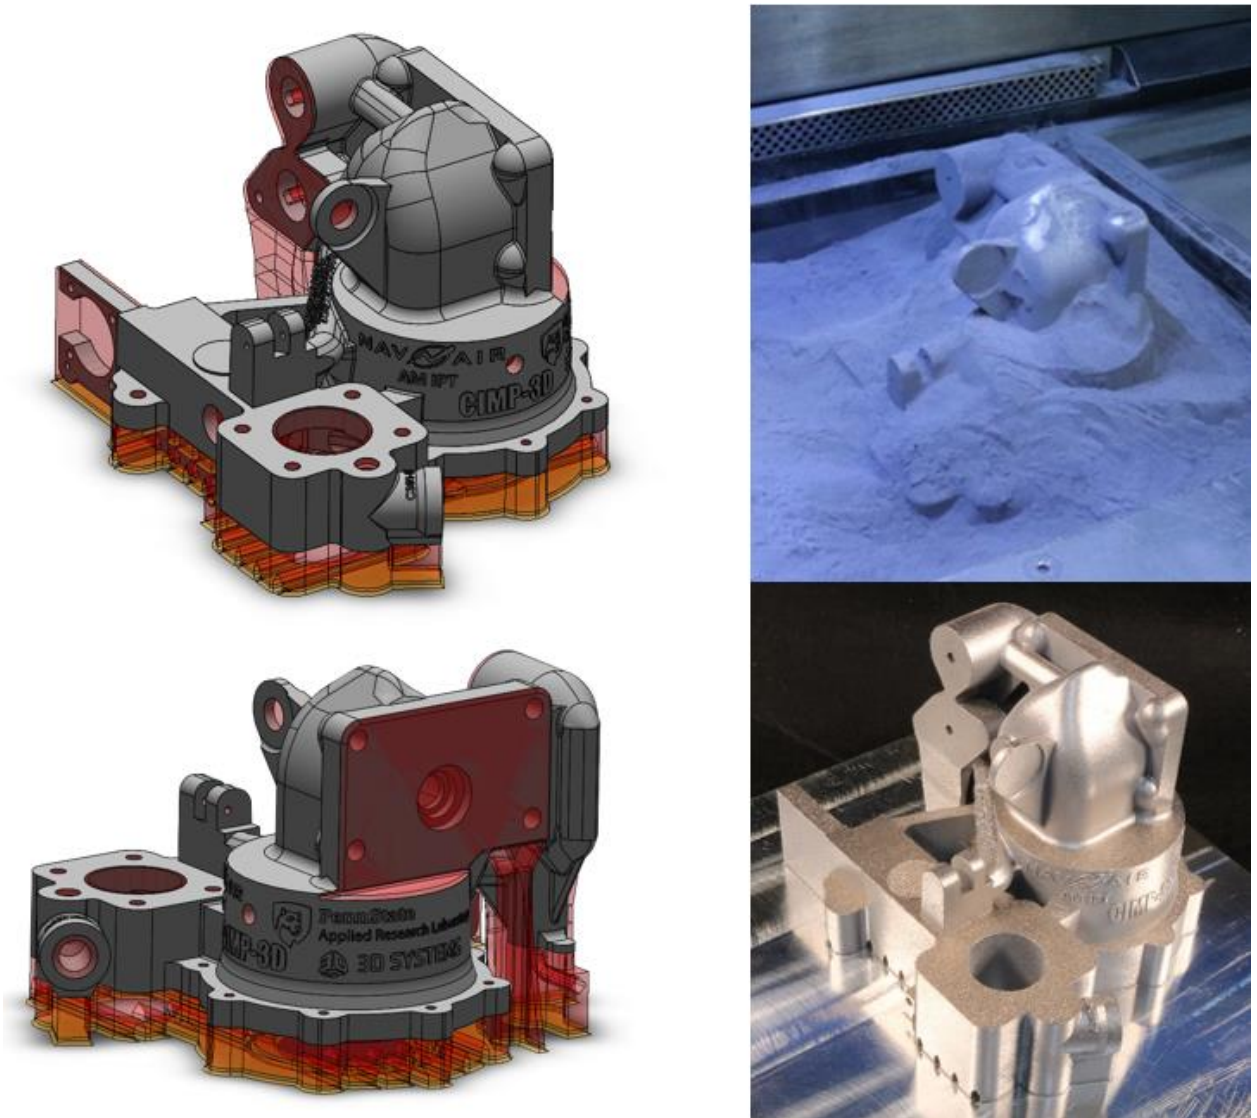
Left the digital model of the produced PBAR, grey is the Committed final part geometry, red is TBR solid support material, orange at the bottom is the 2mm removed during wire EDM process. Top right shows the part in the EOS during powder removal, bottom right shows the part after powder removal
